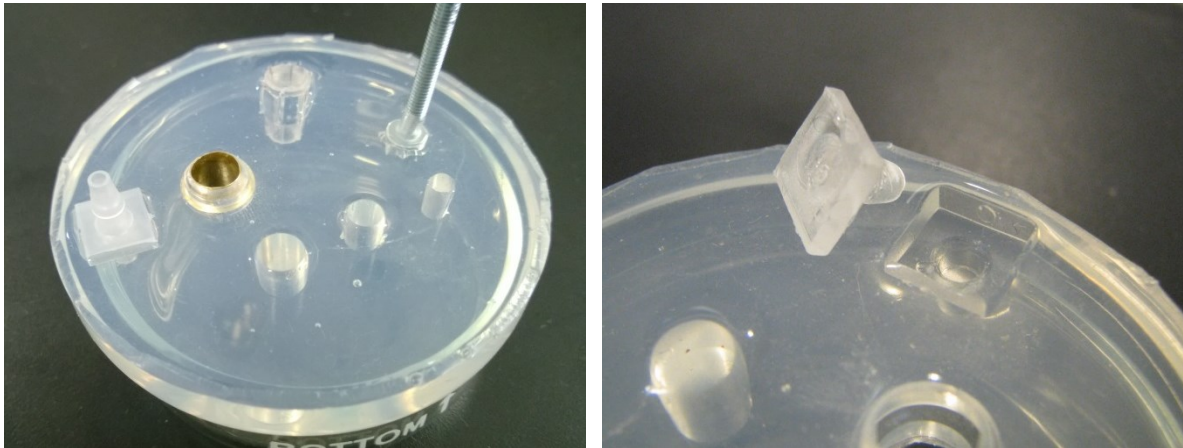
(a) A casting with some of the molded features (b) Dual master thermocompression molded interconnect with a patterned gasket
